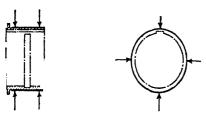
Showing points to check outside diameter of crankshaft sleeve.
